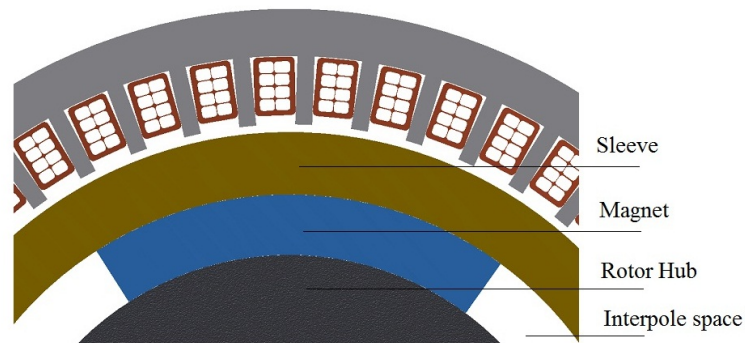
Layout of PM motor with surface-mounted magnets and carbon sleeve. The figure is a front view of a 3D model built by the means of CAD software.
